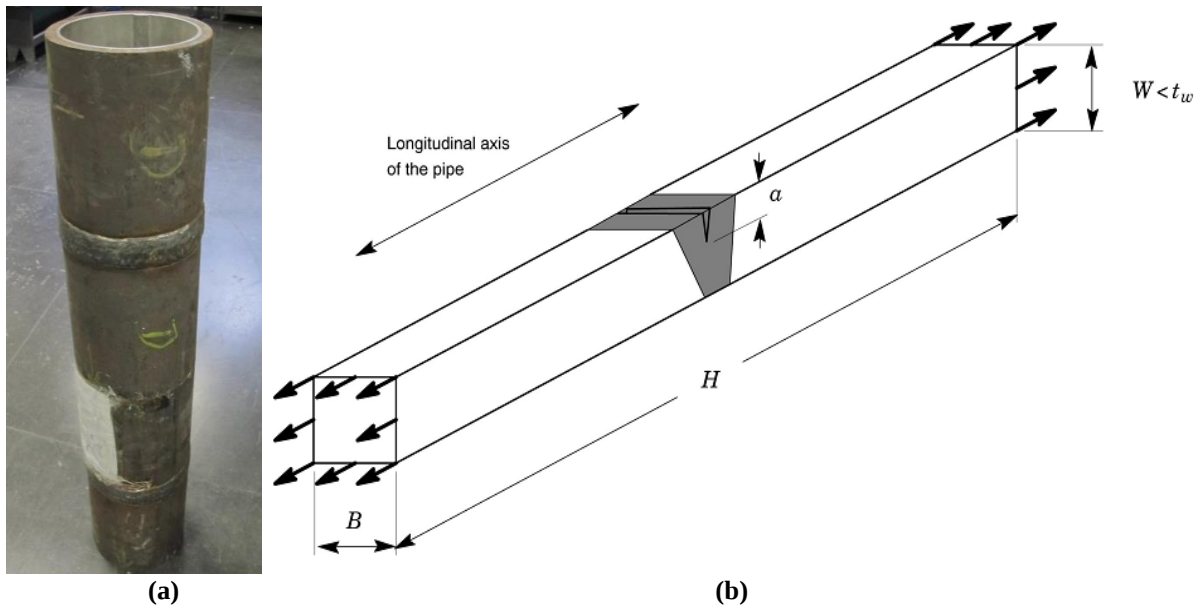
(a) 8-inch pipe (203 mm outer diameter) having overall thickness, $t_w = 19$ mm and clad layer thickness, $t_c = 3$ mm; (b) Geometry of tested clamped SE(T) specimen with $a/W = 0.3$ and $H/W = 10$ having a weld centerline notch and $B \times B$ configuration.
